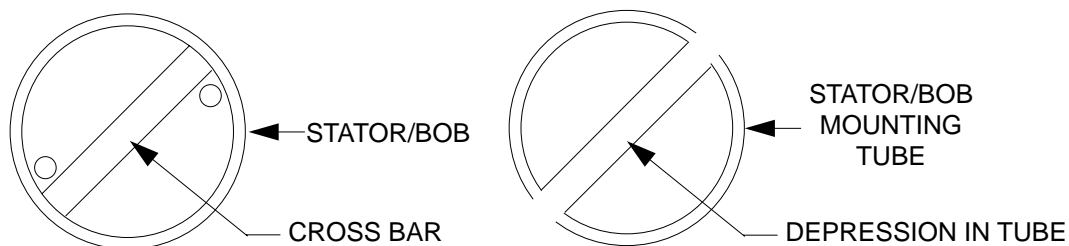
Stator/Bob Mounting Tube Alignment (End View)
